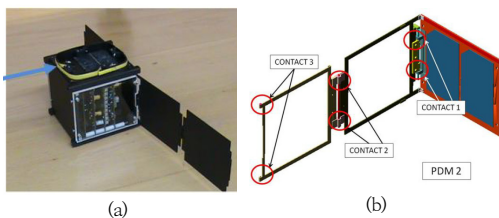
Solar panel mechanism built into the project Xatcobero prototype and panel deployment mechanism simulation[12]
